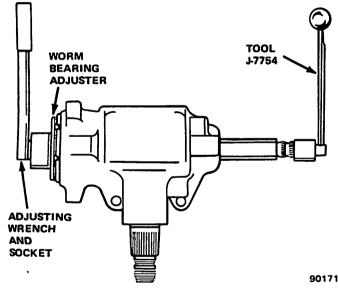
K-16 Adjusting Worm Bearing Preload Torque
